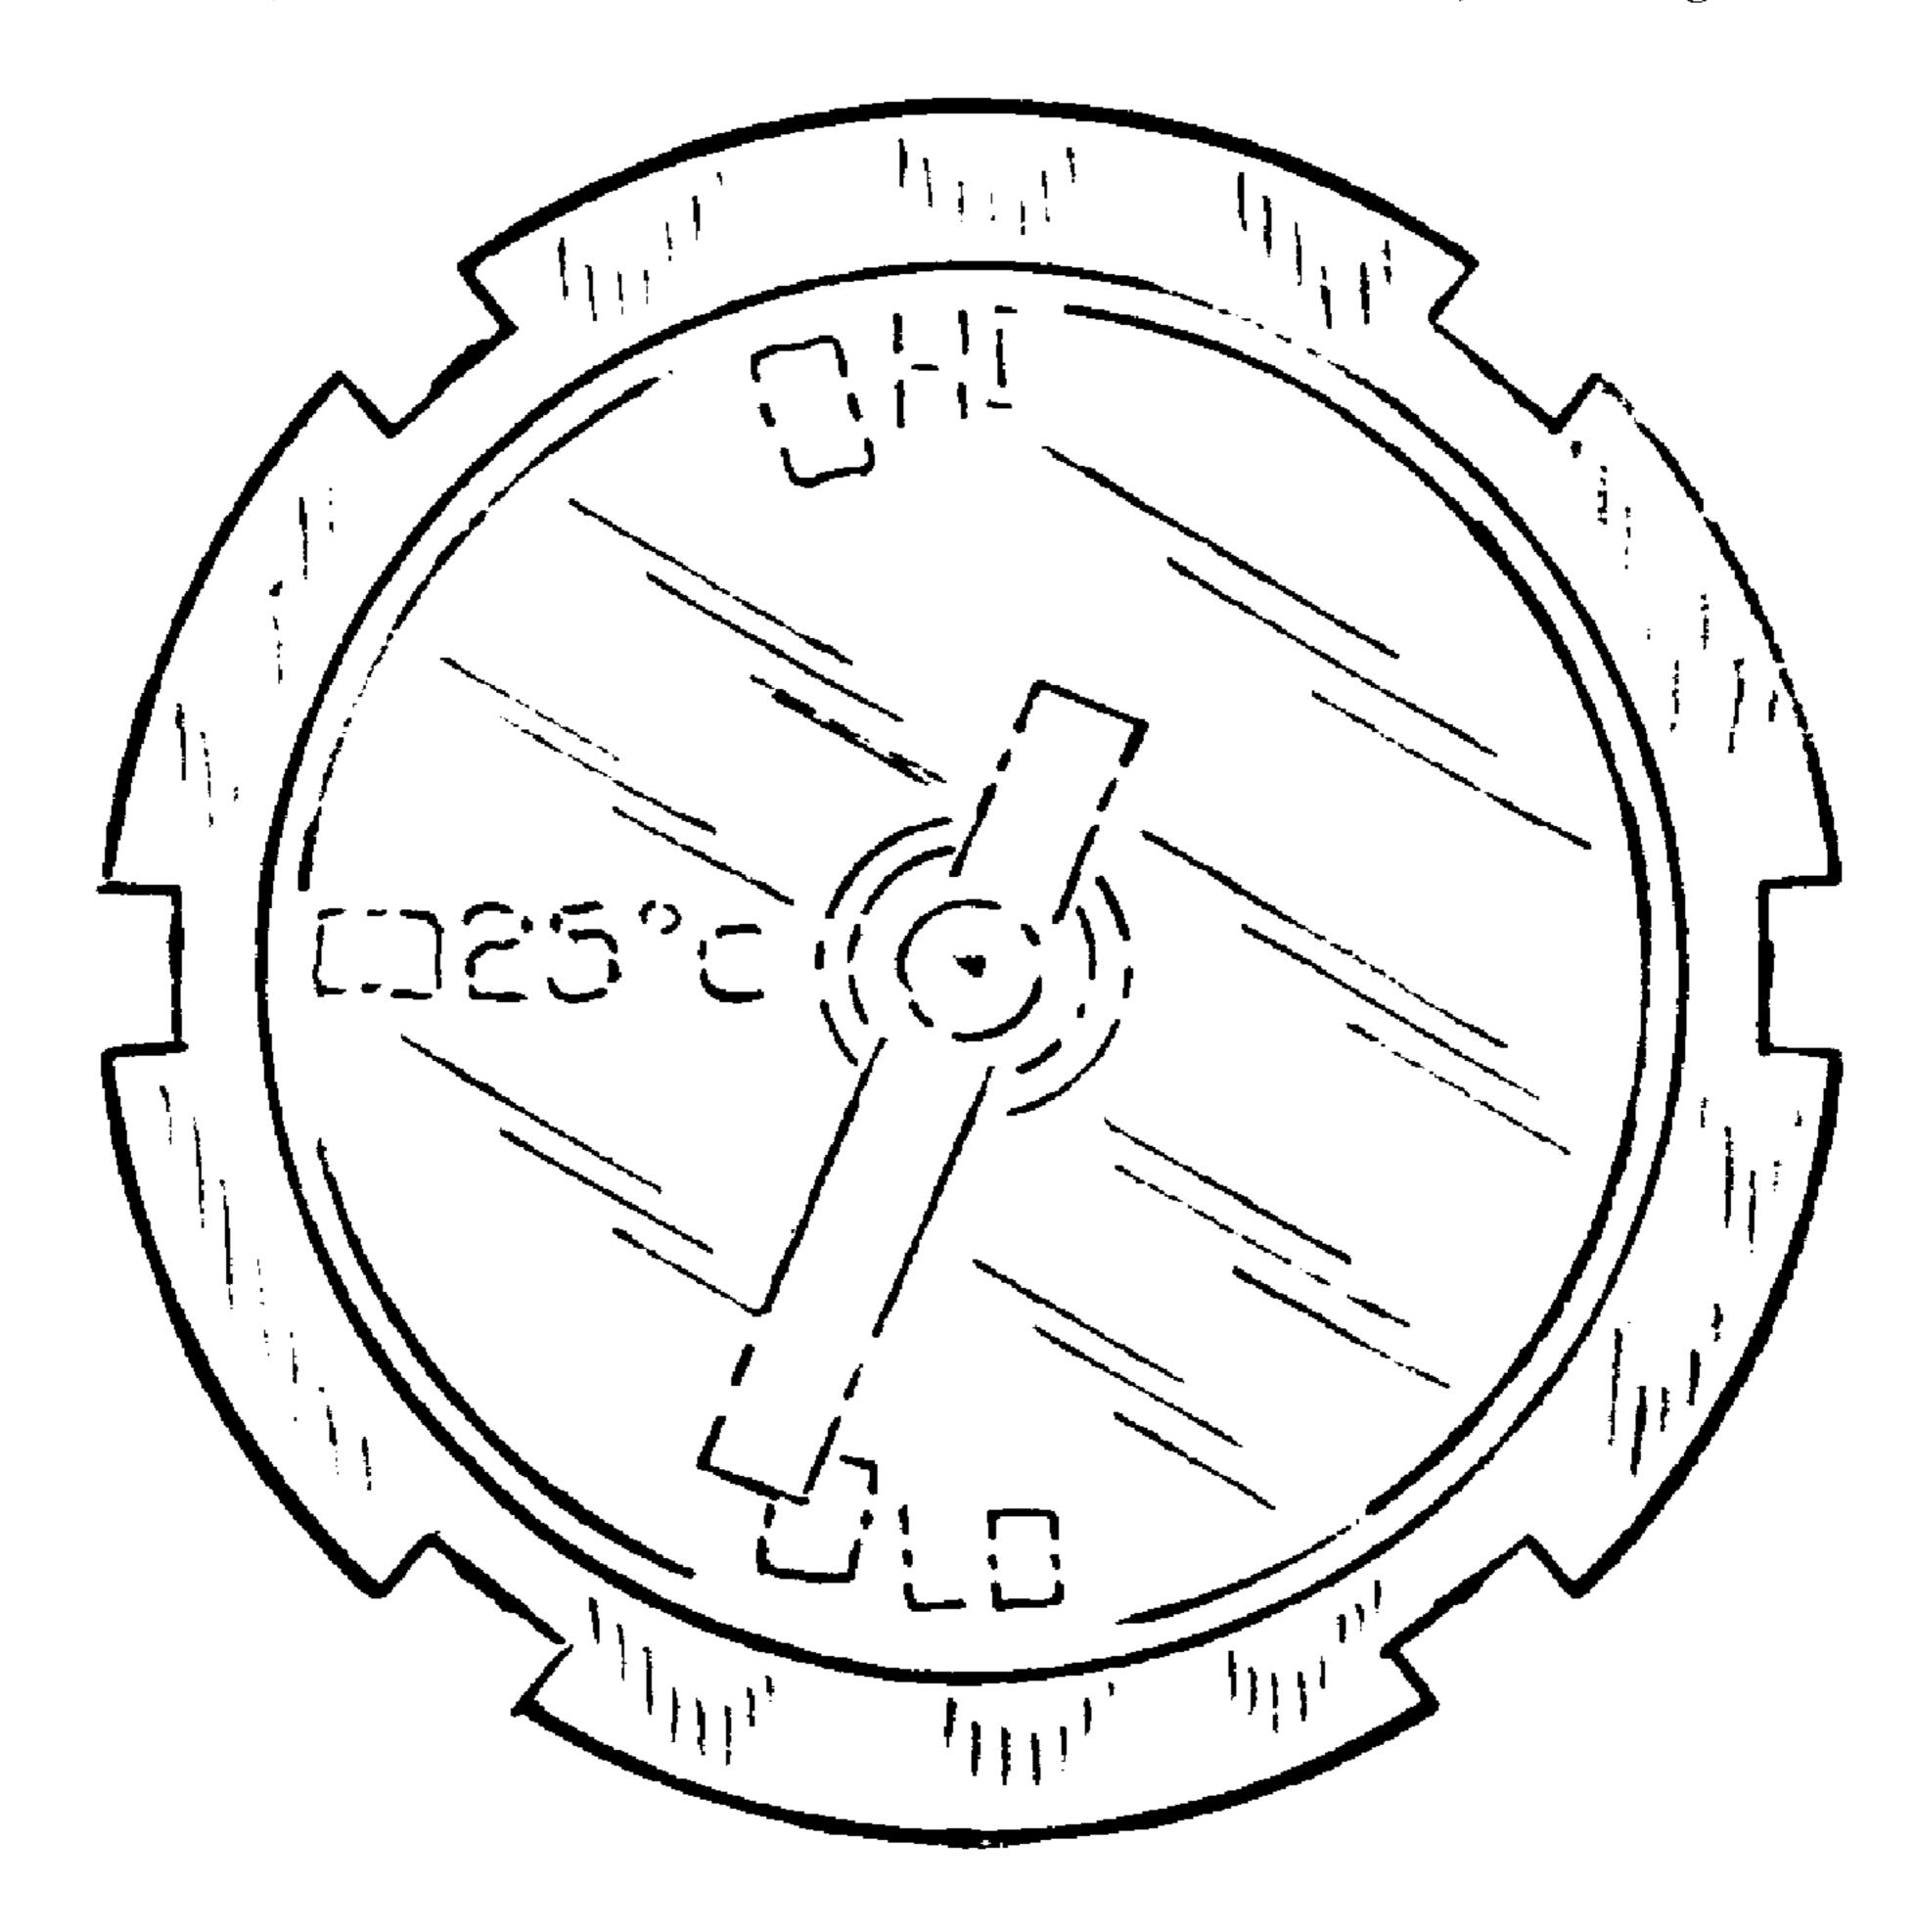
is a front elevational view of a fluid level gauge body, showing my new design.
